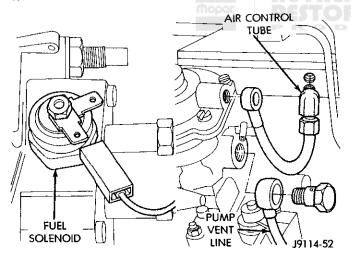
Fuel Solenoid, Air Control Tube, Pump Vent Line
